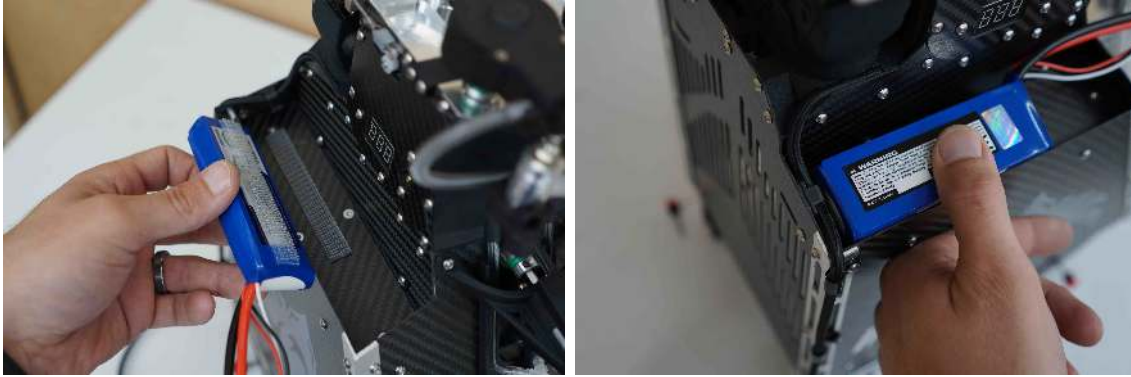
Left: Battery install location. Right: Locate battery all the way forward and to the outside edge. Press to engage fastener.
